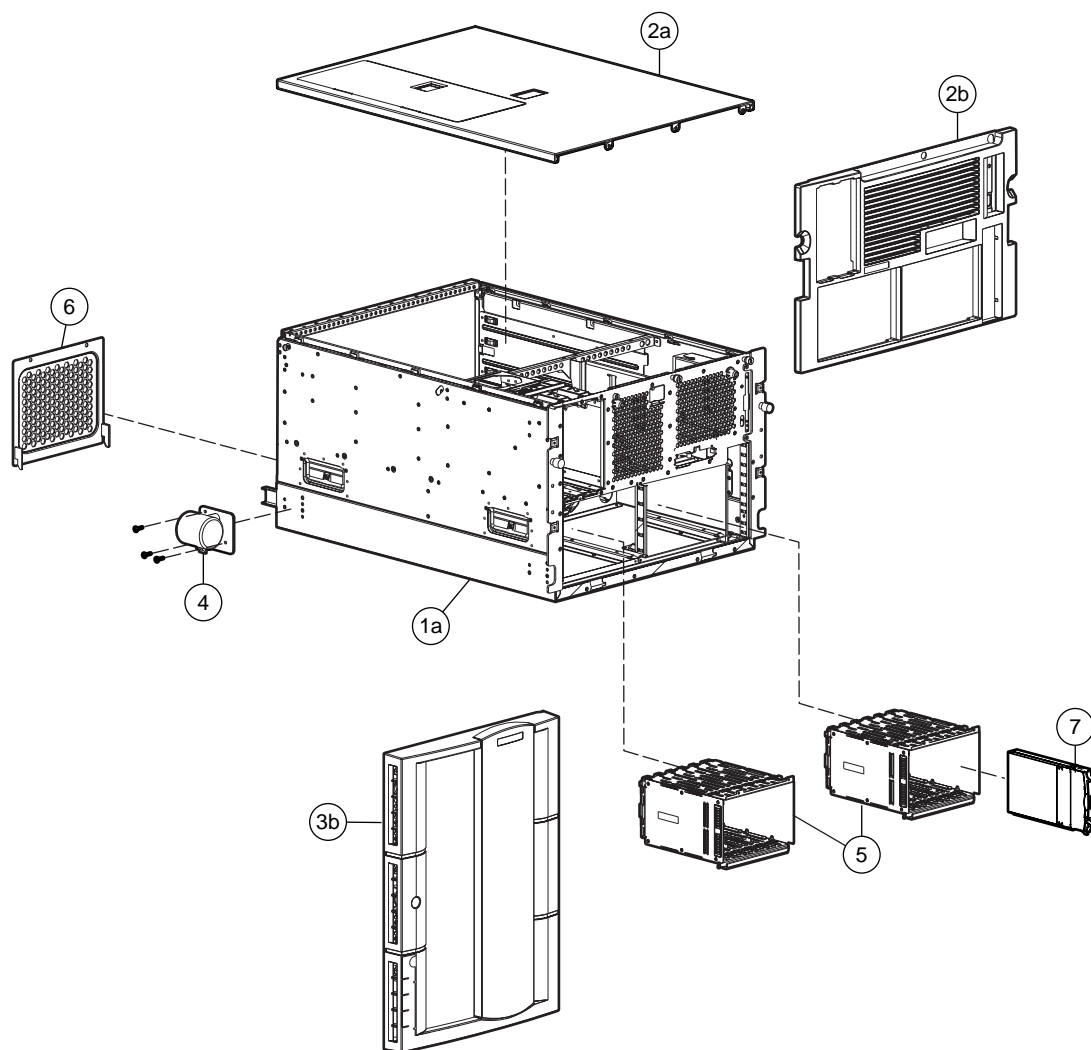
Exploded view of the ProLiant ML570 server chassis components (rack model)
